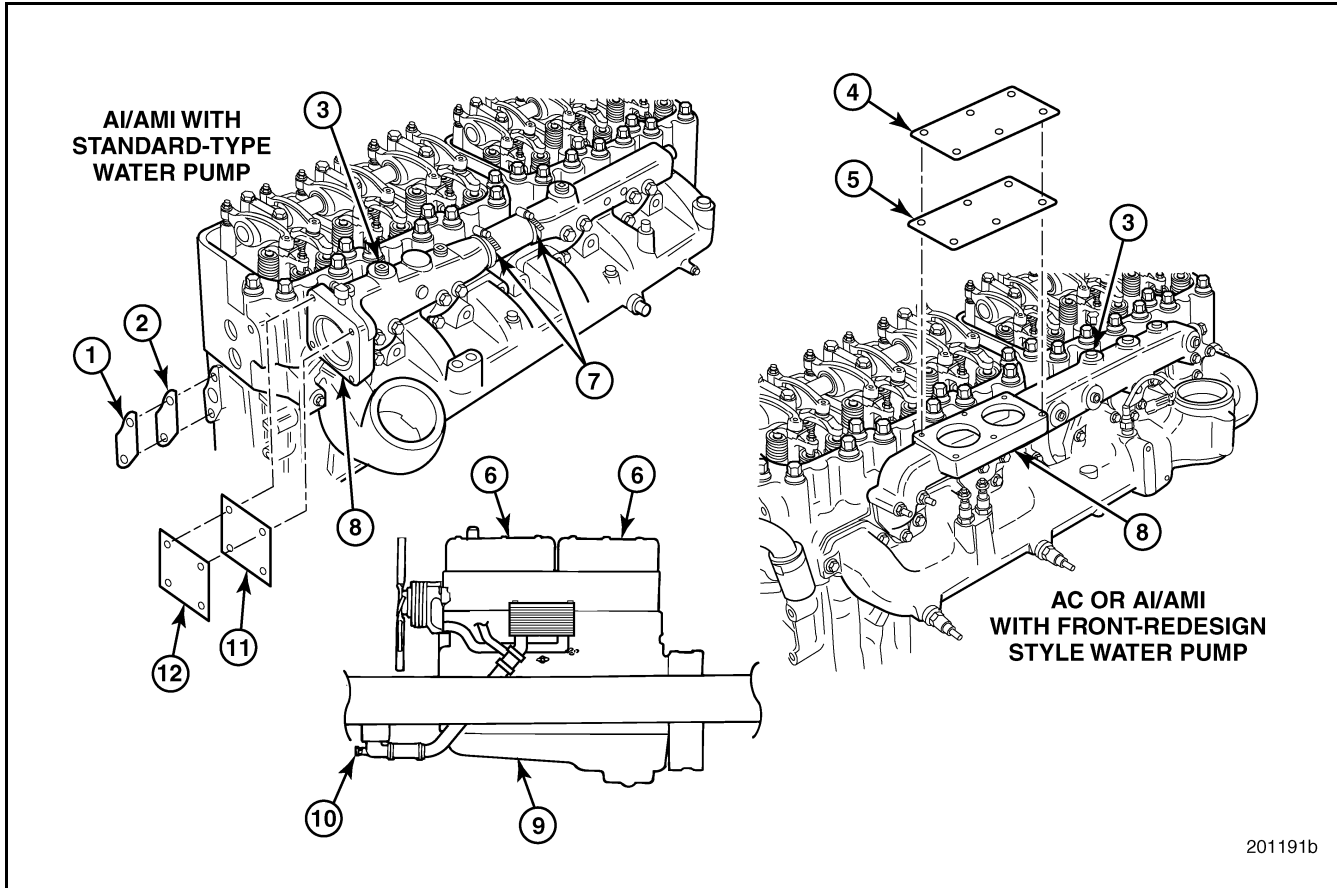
Cylinder Block/Cylinder Head Leak Check (In Chassis)
